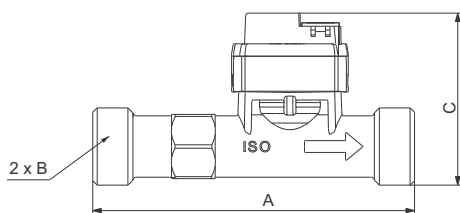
Dimensions, MFS QT 2-18 l/min, with threads
